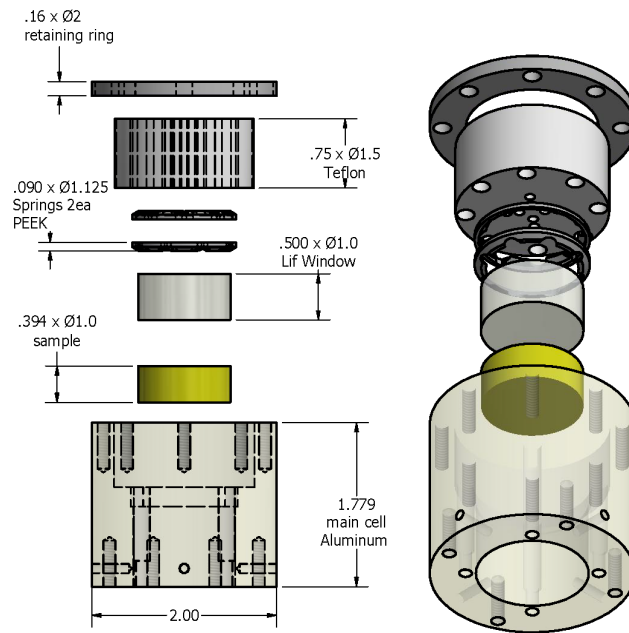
An exploded schematic of the heated target used for the 1.5 GPa experiments. The buffer plate, which would also act as the impact surface, is not shown. All dimensions are in inches.
